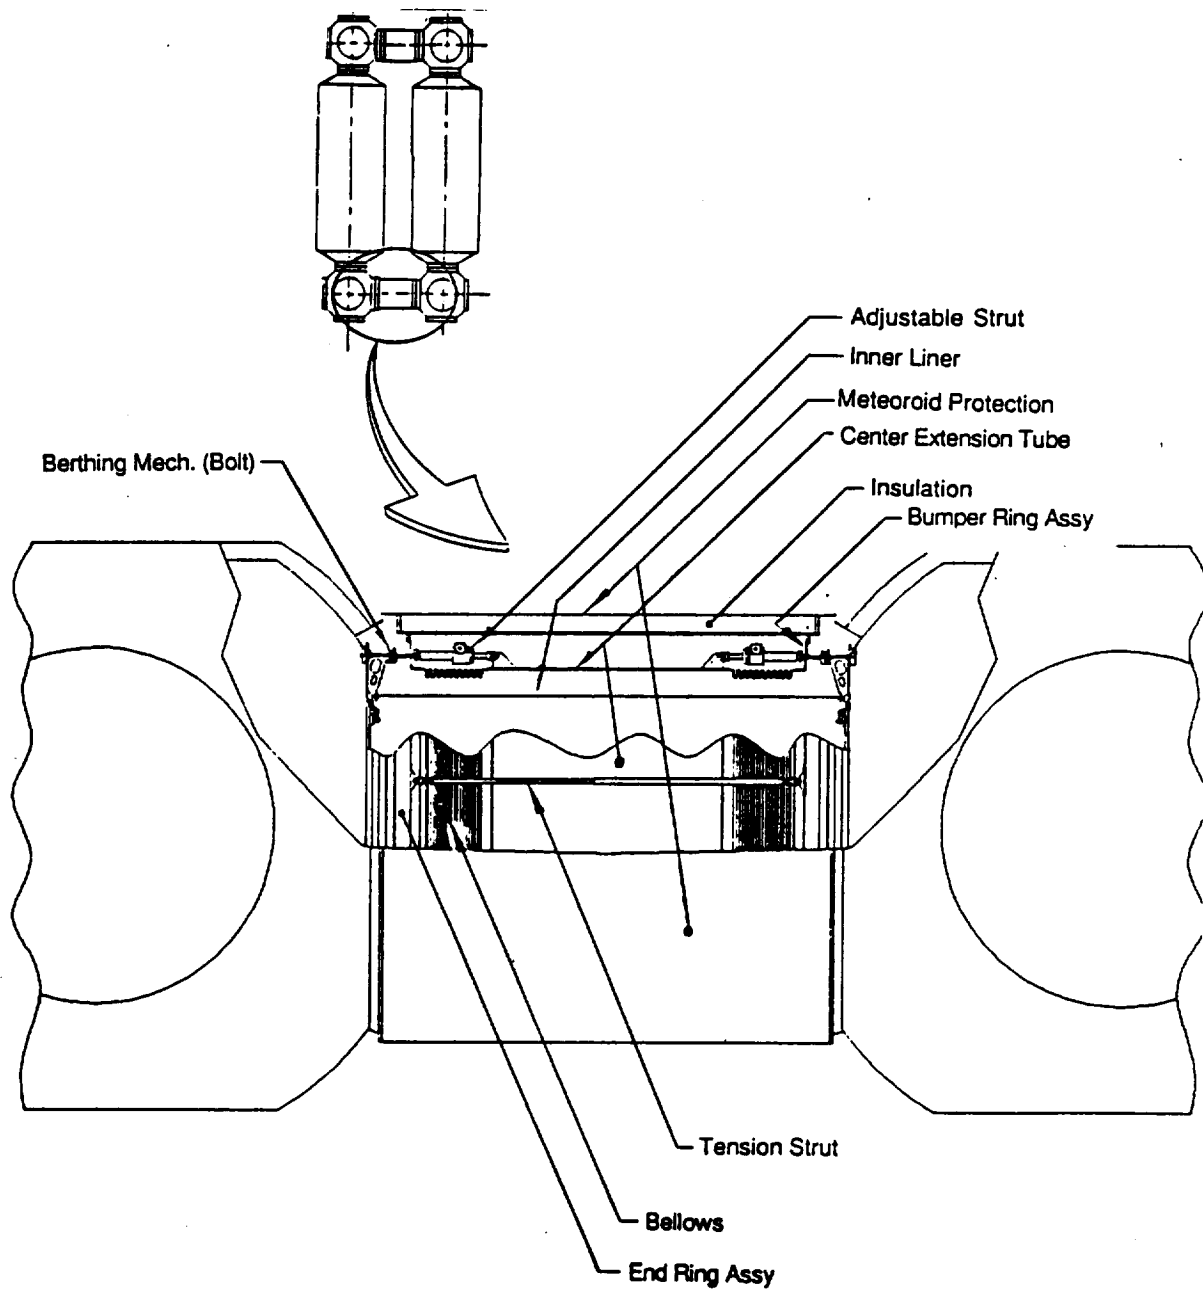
Flexible Interconnect Key to Pressurized Module Assembly
